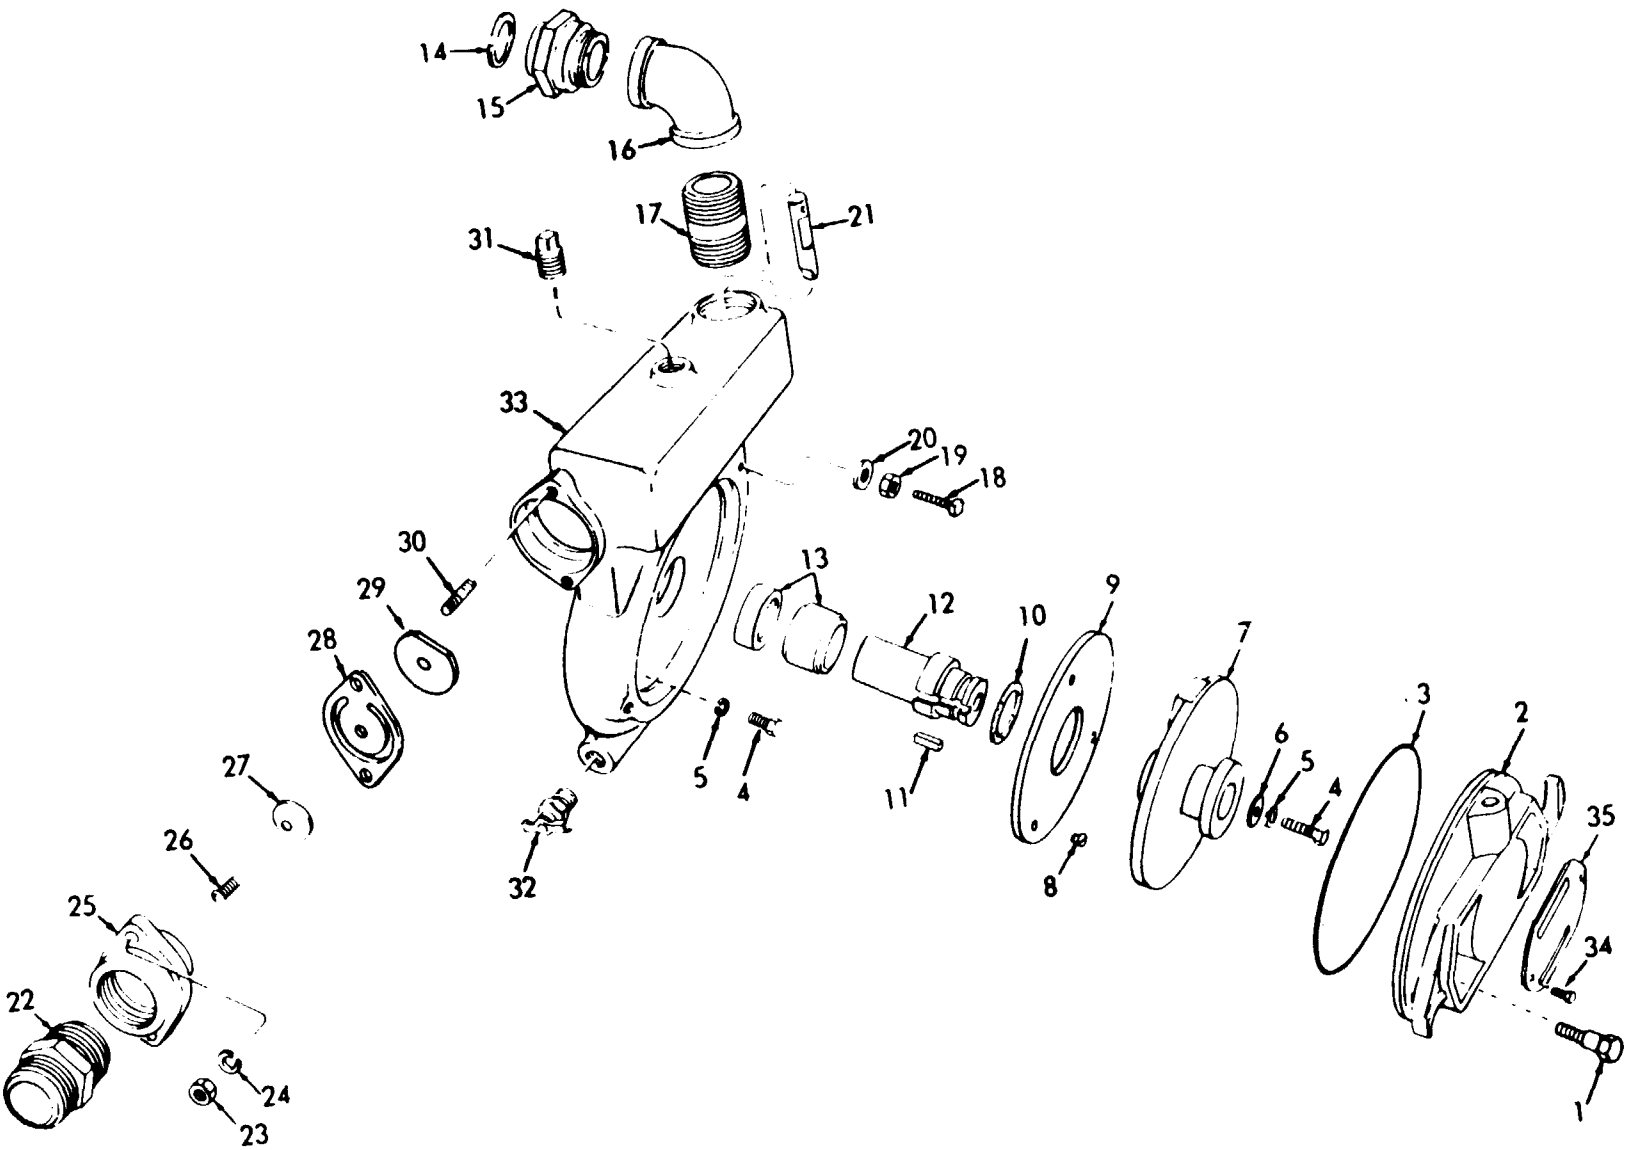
Centrifugal Pump Assembly, Disassembly and Reassembly.
